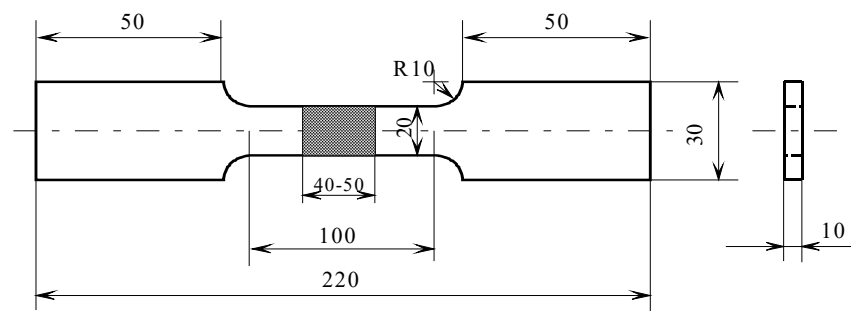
Specimen for tensile testing of welded joint [32].
